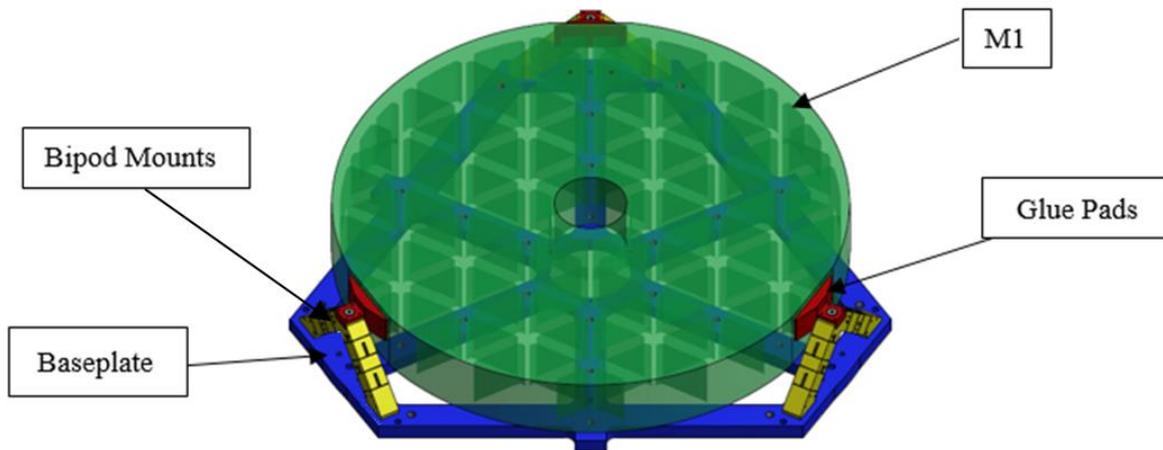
Primary mirror assembly with baseplate, M1 mirror, glue pads and bi-pod mounts.
